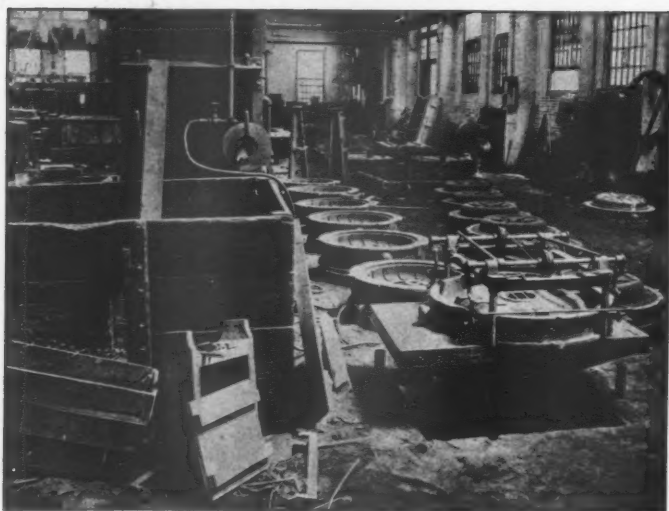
WHAT A MOLDING MACHINE CAN DO IN A JOBBING FOUNDRY
